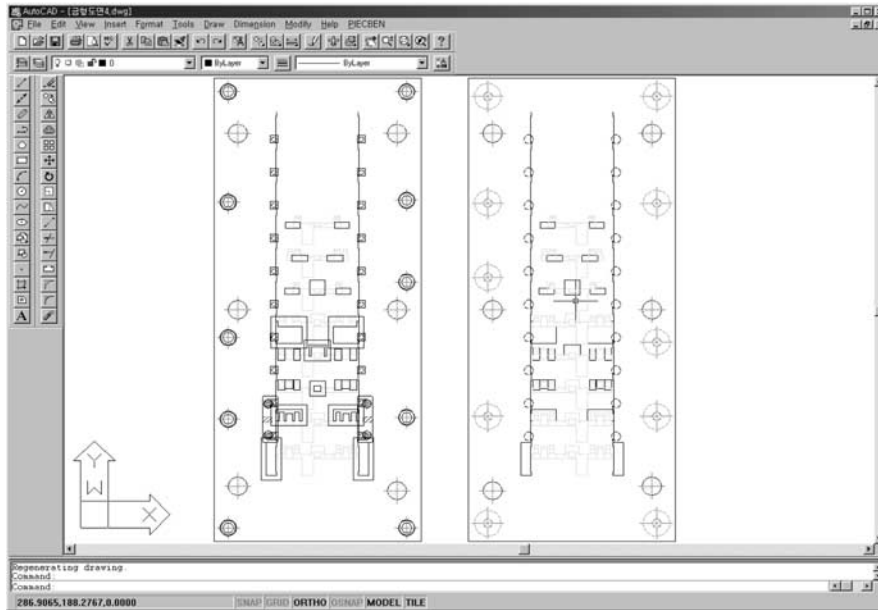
A die set drawing generated in the die layout module for the sample in Fig. 9(c).
